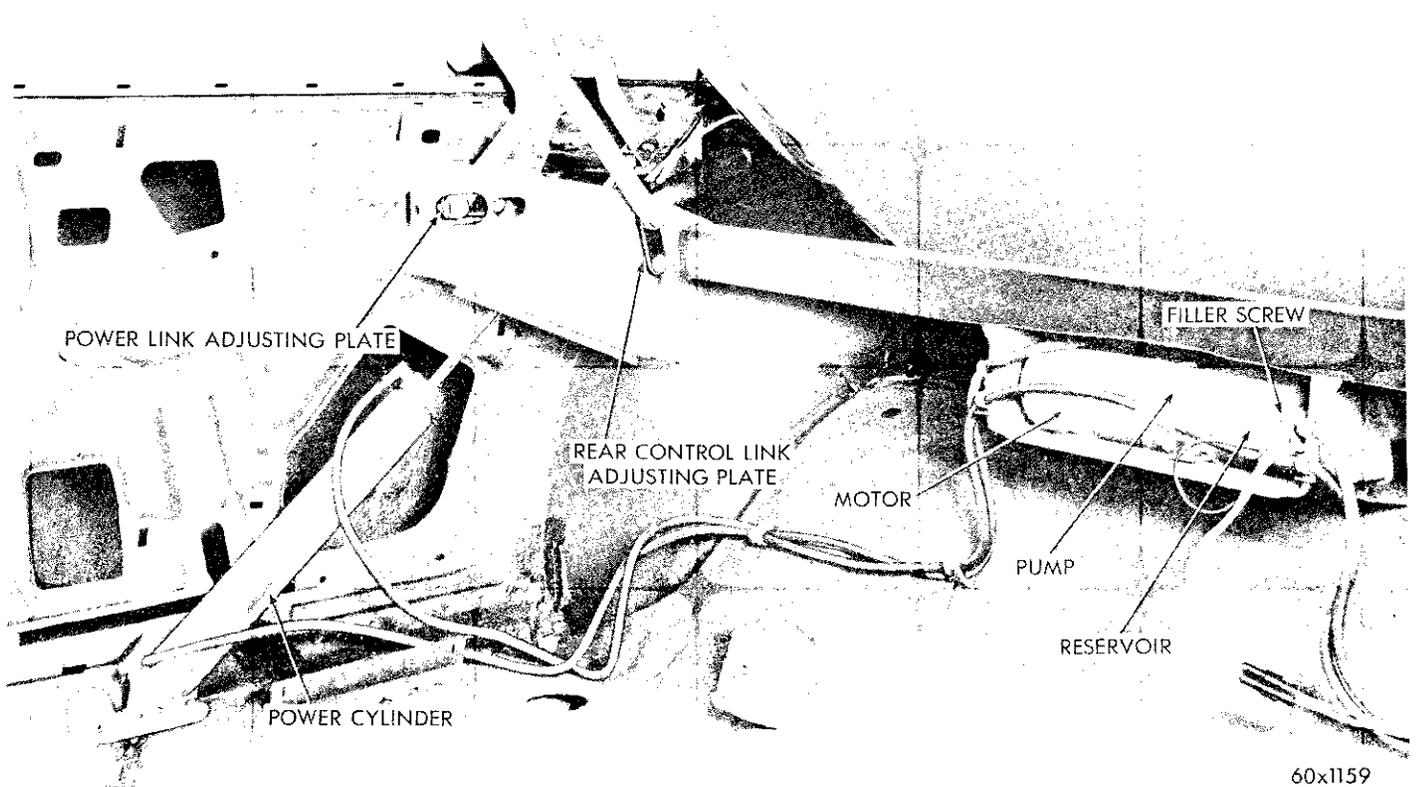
Convertible Top Hydraulic Folding Mechanism
